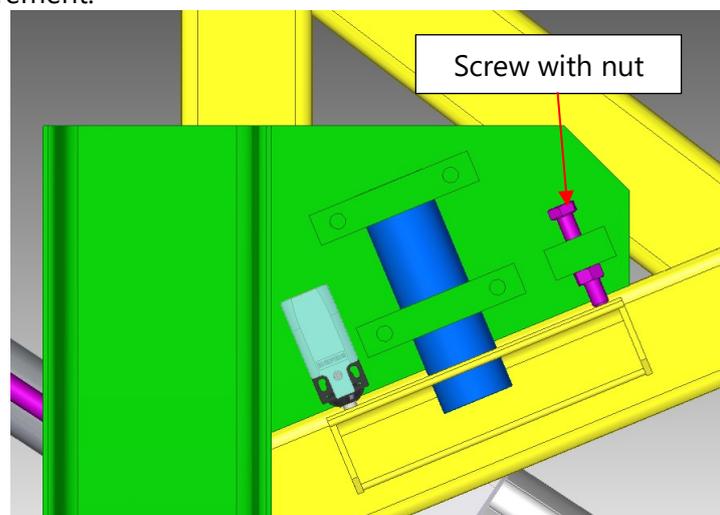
Side view of the adjustable mechanical stop for the shutter opened position
